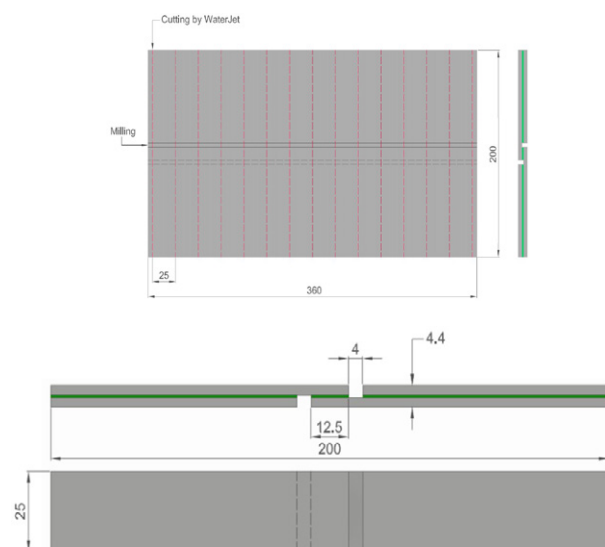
Dimensions of sample sheets with the cutting path for the shear test (a); geometry and dimensions of specimens for shear strength test (b)
